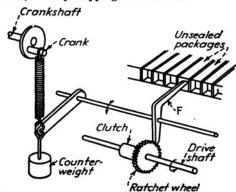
Arrangement used on some package-loading machines to stop the machine if a package should pass the loading station without receiving an insert. Pawl finger F has a rocking motion obtained from crankshaft, timed so that it enters the unsealed packages and is stopped against the contents. If the box is not filled, the finger enters a considerable distance and the pawl end at the bottom engages and holds a ratchet wheel on the driving clutch, which disengages the machine driving shaft.
